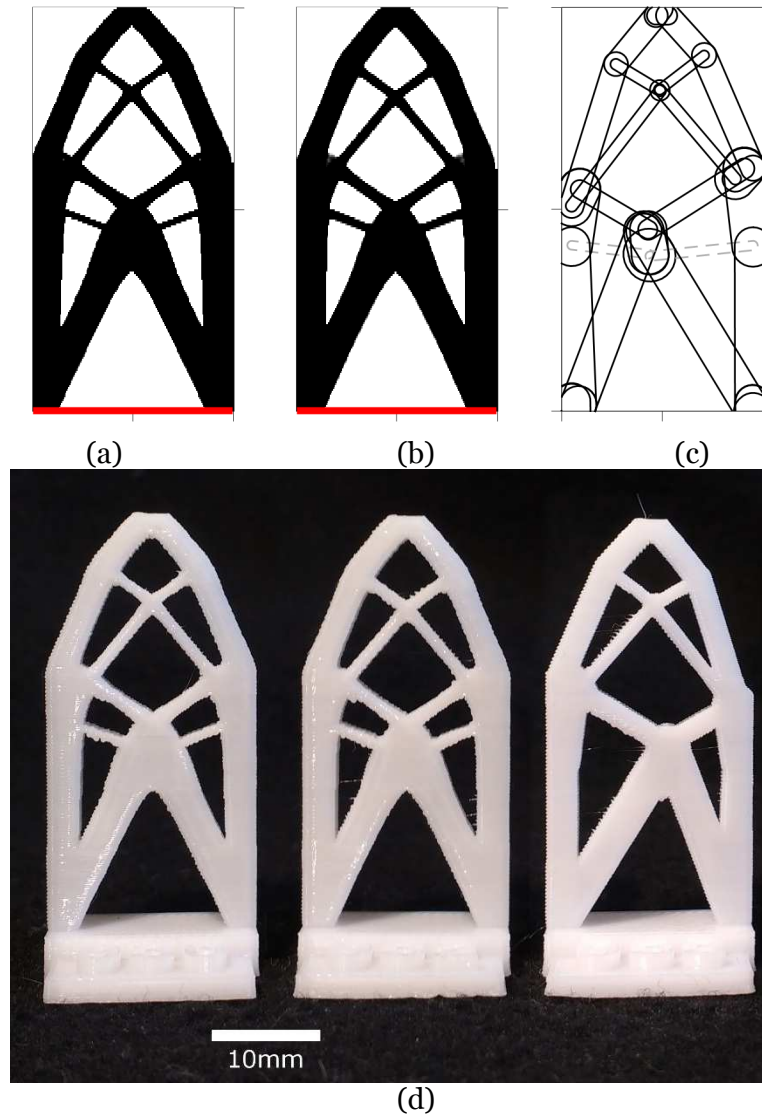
Three manufactured SIMP designs. (a) SIMP, minimum diameter of 0.71mm, (b) SIMP, minimum thickness of 1.0mm, (c) Bootstrapped MMC with manufacturable minimum thickness. (d) Manufactured form of each of the above.
